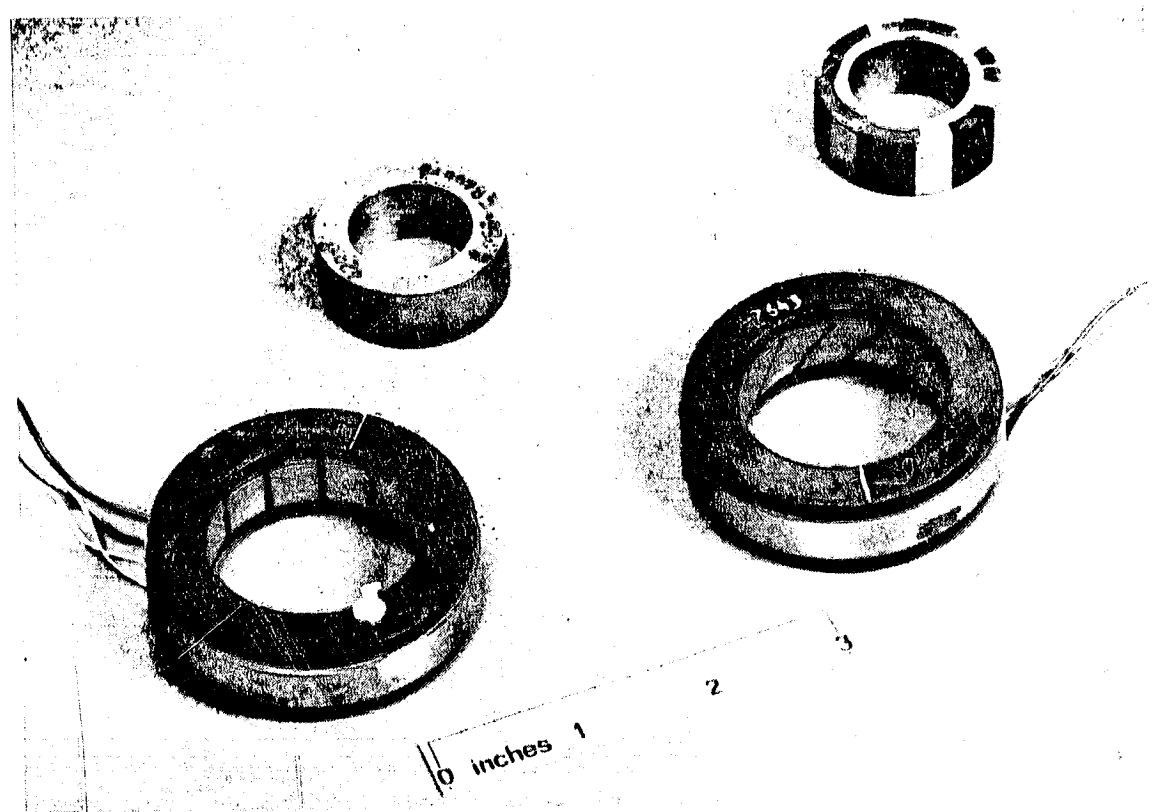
Filter wheel motors - primary drive on right, tach (redundant drive) on left.
